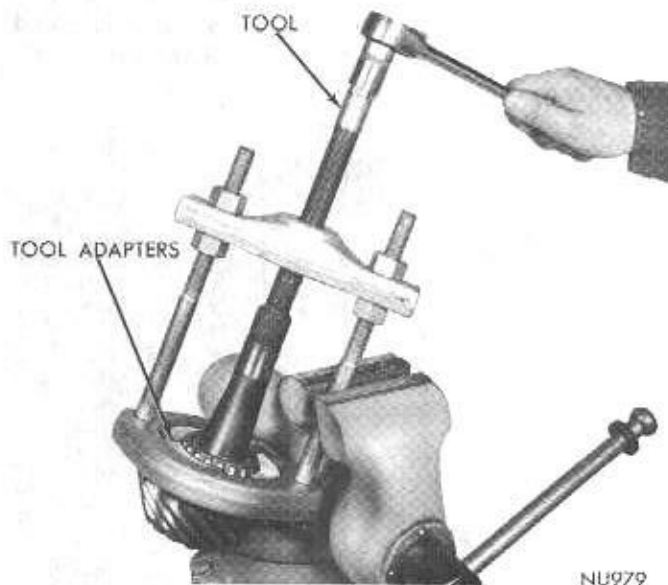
Removing Drive Pinion Rear Bearing Cone
